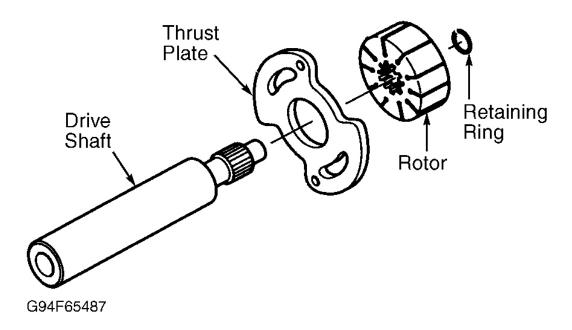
Assembling Drive Shaft Subassembly Courtesy of GENERAL MOTORS CORP.
